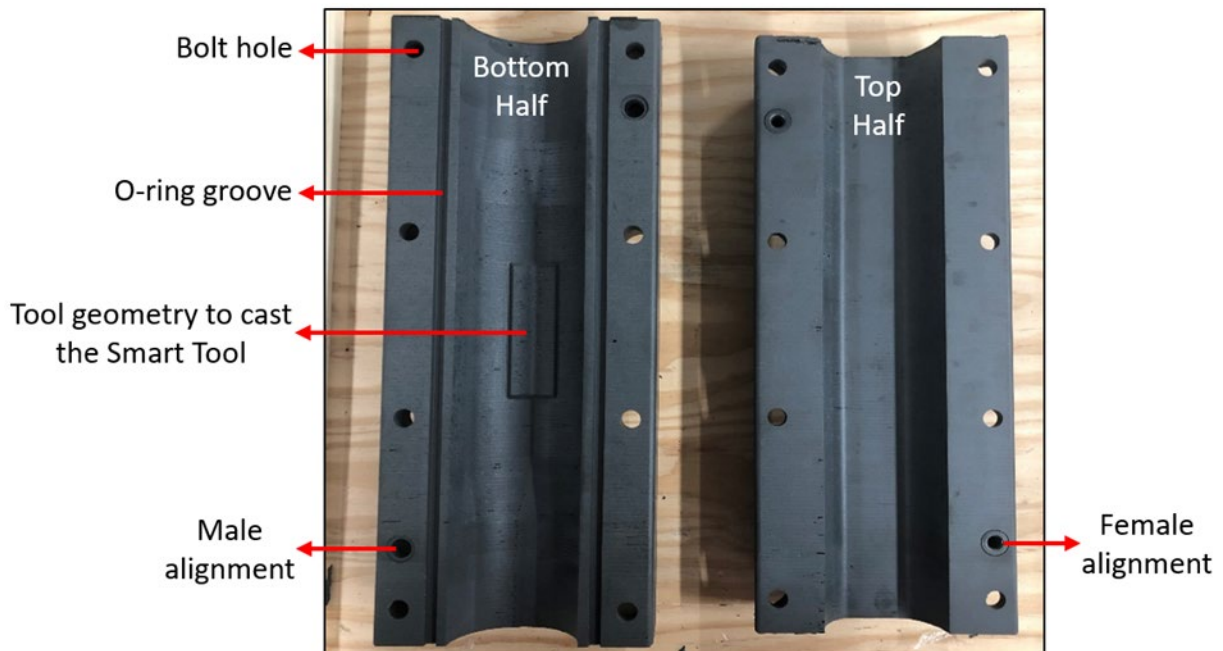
Demo Tube Form Mold Modified SOLIDWORKS Files
